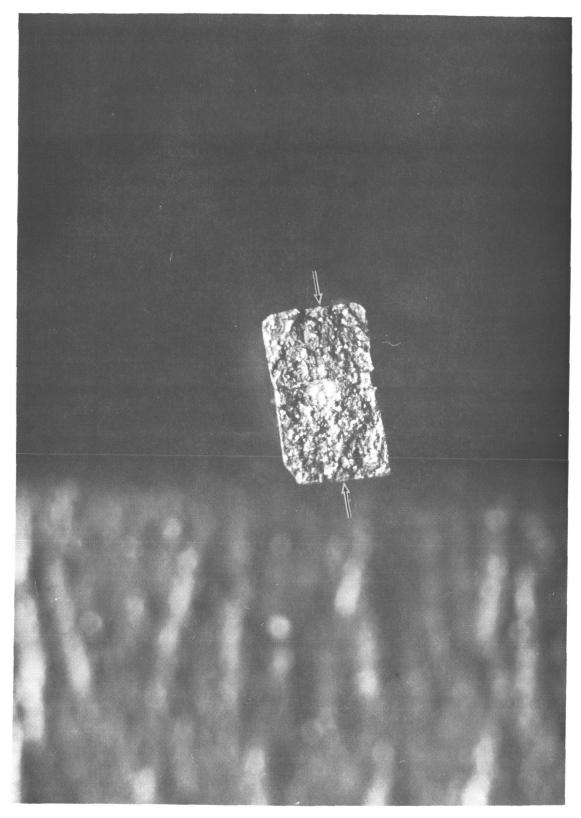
Closeup of Typical Beam Fracture Showing Fatigue Failure Progressing from Origins (Arrows) H-57708
